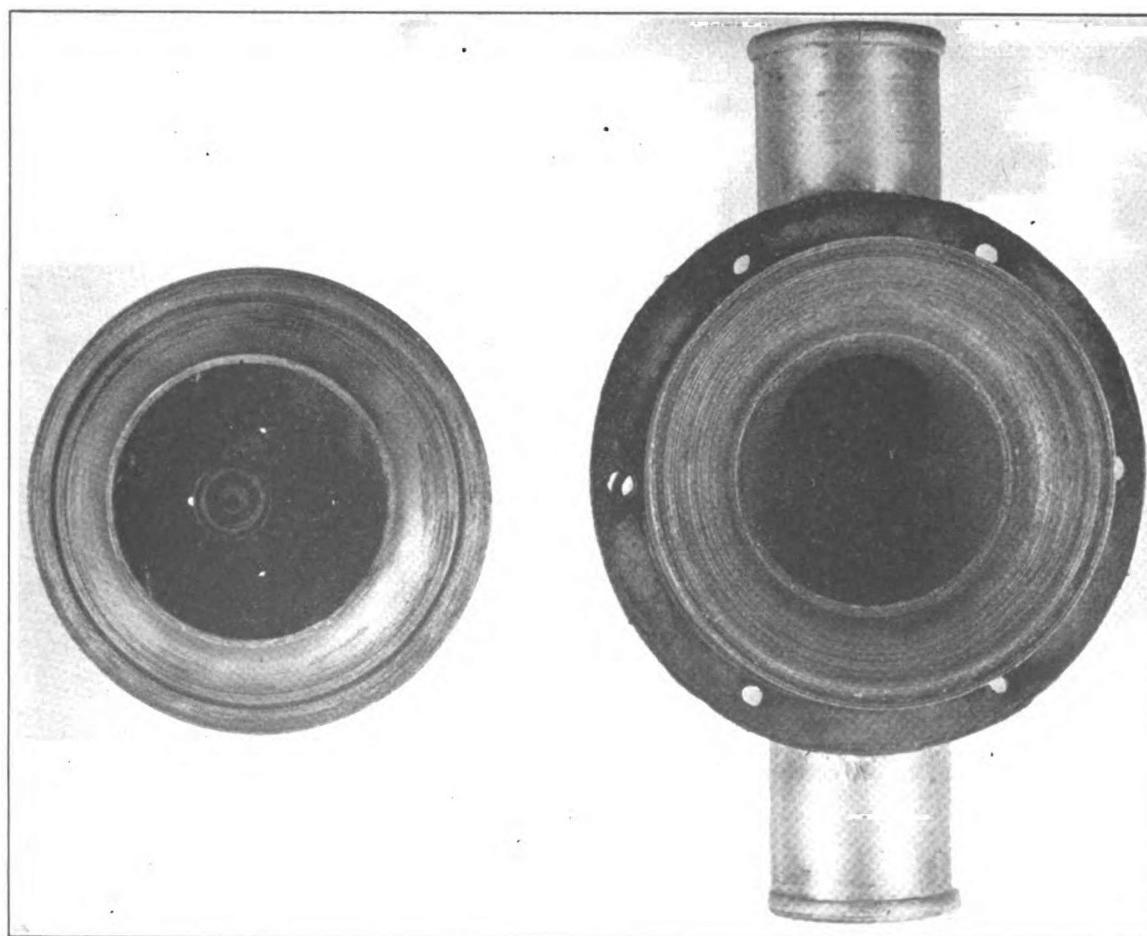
Water pump showing wear on impeller and lower casing. The wear developed during the dynamometer runs, but the pump was used during the torque stand after lignum vitae was substituted for the bronze button on the case.
